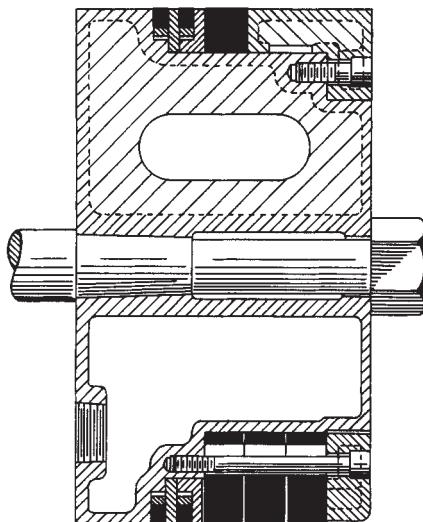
Piston equipped with carbon piston and wearing rings for a non-lubricated cylinder.
